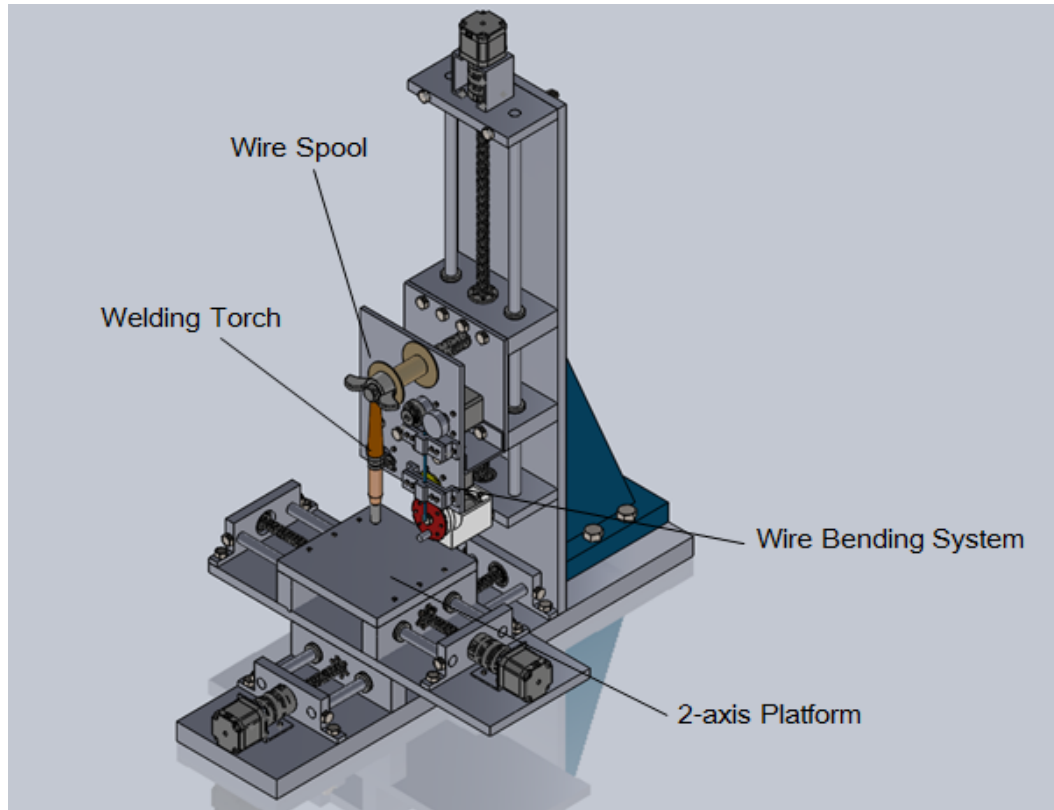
CAD Model for the desktop metal wire-feed prototyping machine (Welder is not included)
